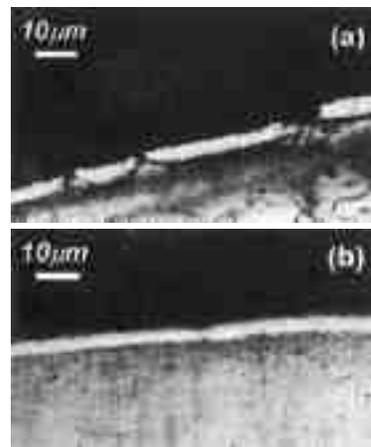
Microscopic images, cross sections of (a) typical nickel and (b) conformable nickel/palladium surface finishes plated on alloy 194 leadframes after 90-degree bend with a radius of 0.25 mm.
